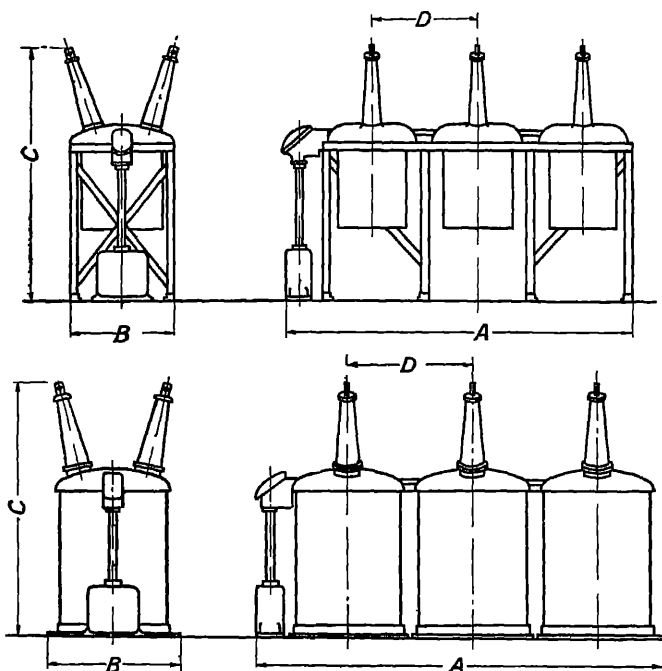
KEY SKETCH FOR TABLE OF DIMENSIONS
